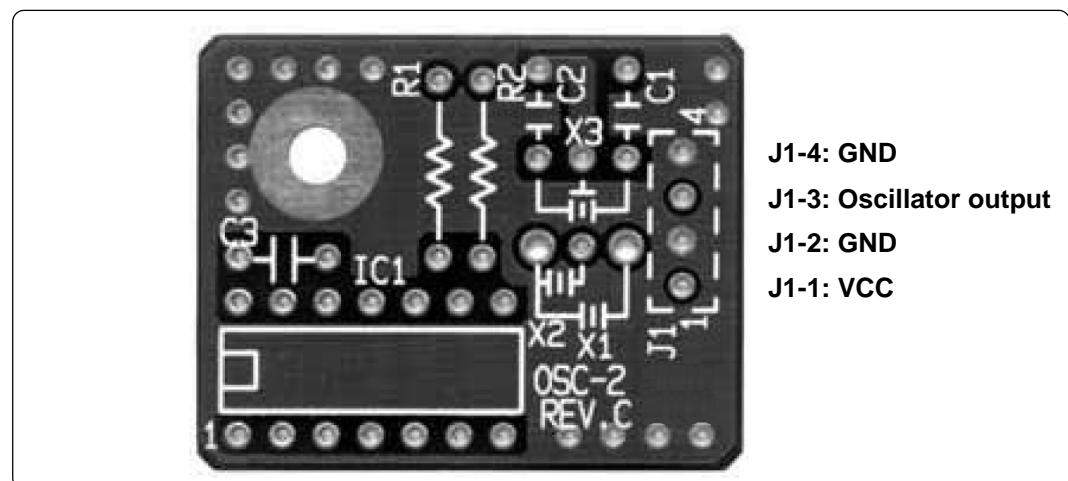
External view of the oscillator board (OSC-2) and connector pin assignment
